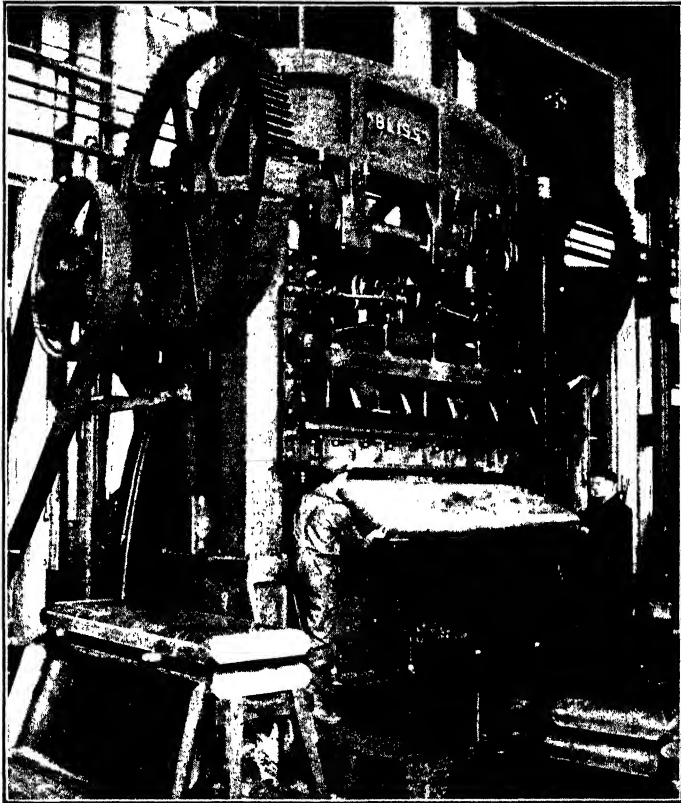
A single-action press with spring drawing attachment and double-action die, producing a large casket part.
